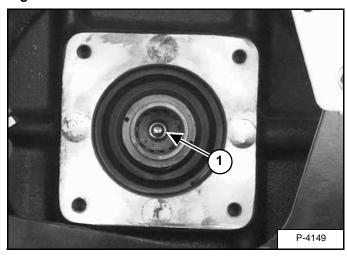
shows the motor carrier seal correctly installed.
